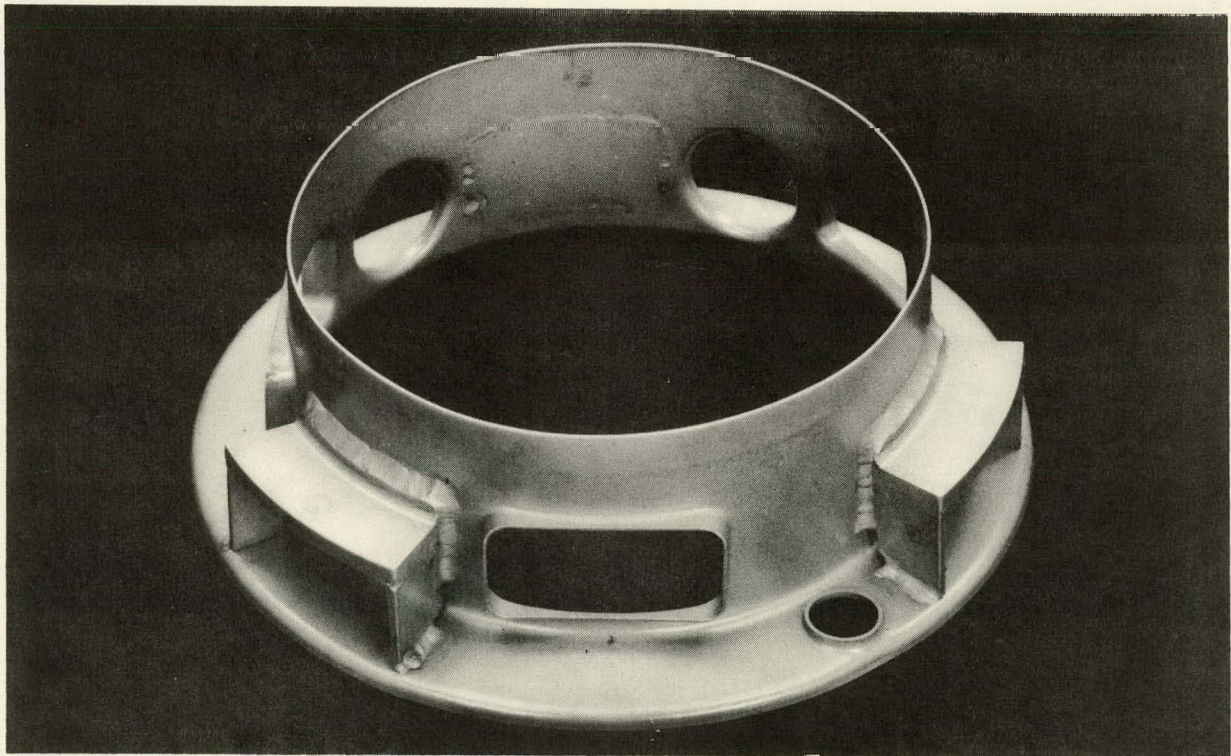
Formed Sheet Metal Welded Assembly
